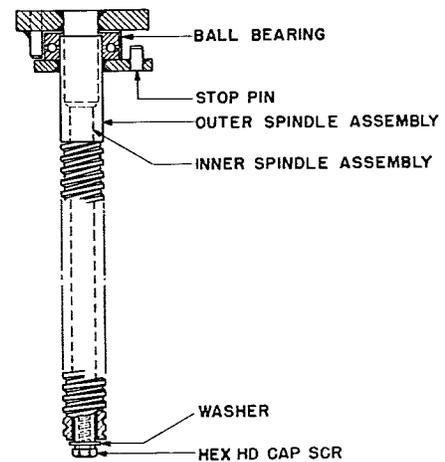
B—Stop-pin-type Spindle—Ball Bearing
